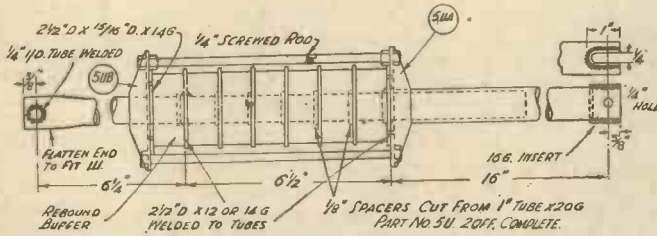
Thread fittings 5UA on the tubes and fix to the discs by means of two rivets.
